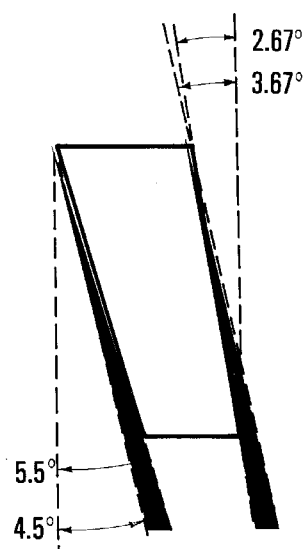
Helix angles of the thread and clearance angles necessary for a square threading tool.
